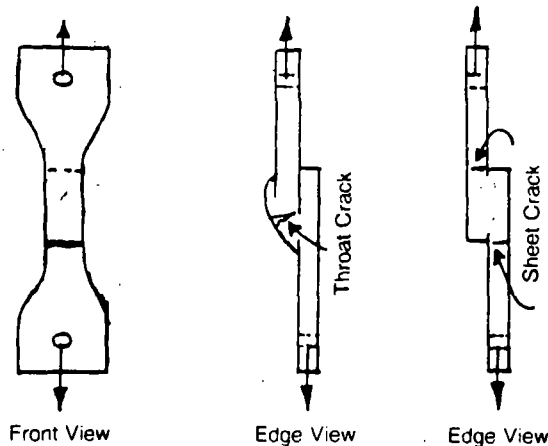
Details of test specimens from ASTM D2552 modified test for HDPE seams.
